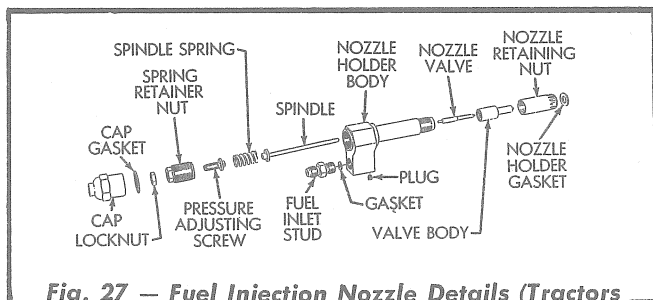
Fuel Injection Nozzle Details (Tractors Serial No. 4001 and Above)
